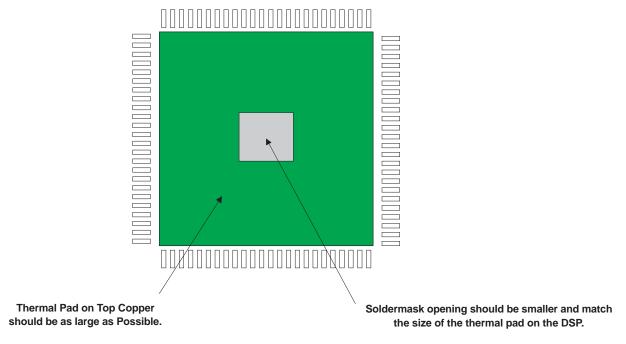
Soldermask Opening Should Match Size of DSP Thermal Pad
